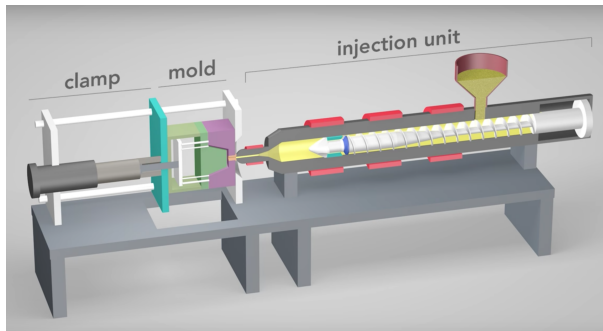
Computer graphics of an injection moulder. It is made by three main part: the injection unit, the mould and the clamp. Inside the mould the prototypes were manufactured.
